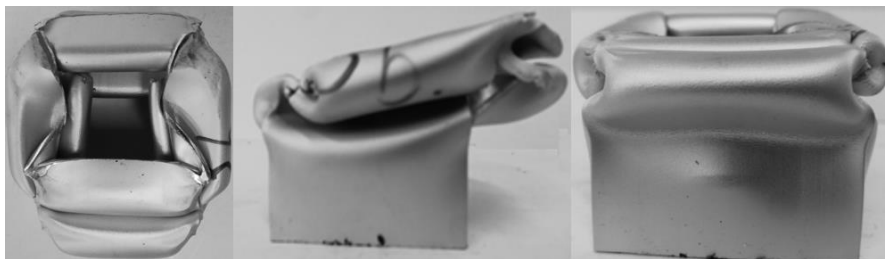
Final views of crushed specimen in test 3b under contact in edge
